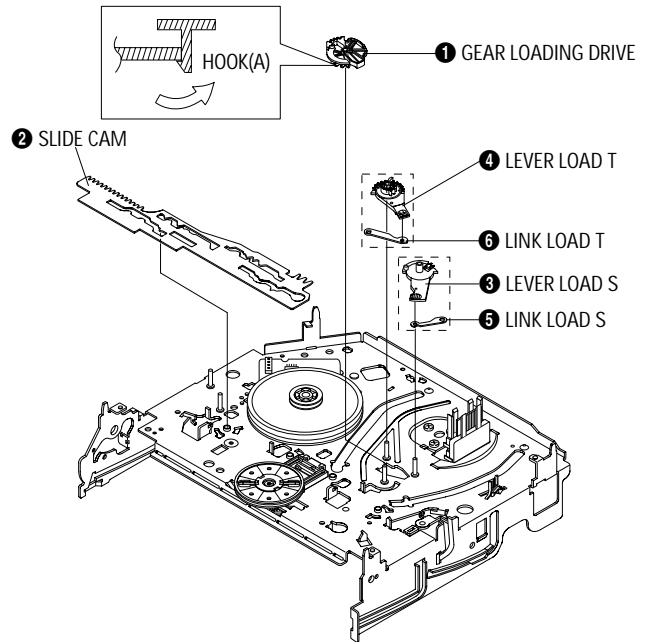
Gear Loading Drive, Slider Cam, Lever T, S Load Ass'y Removal
